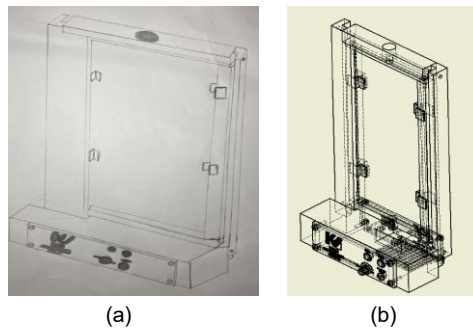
(a) Idea Drawing (b) Isometric Drawing
